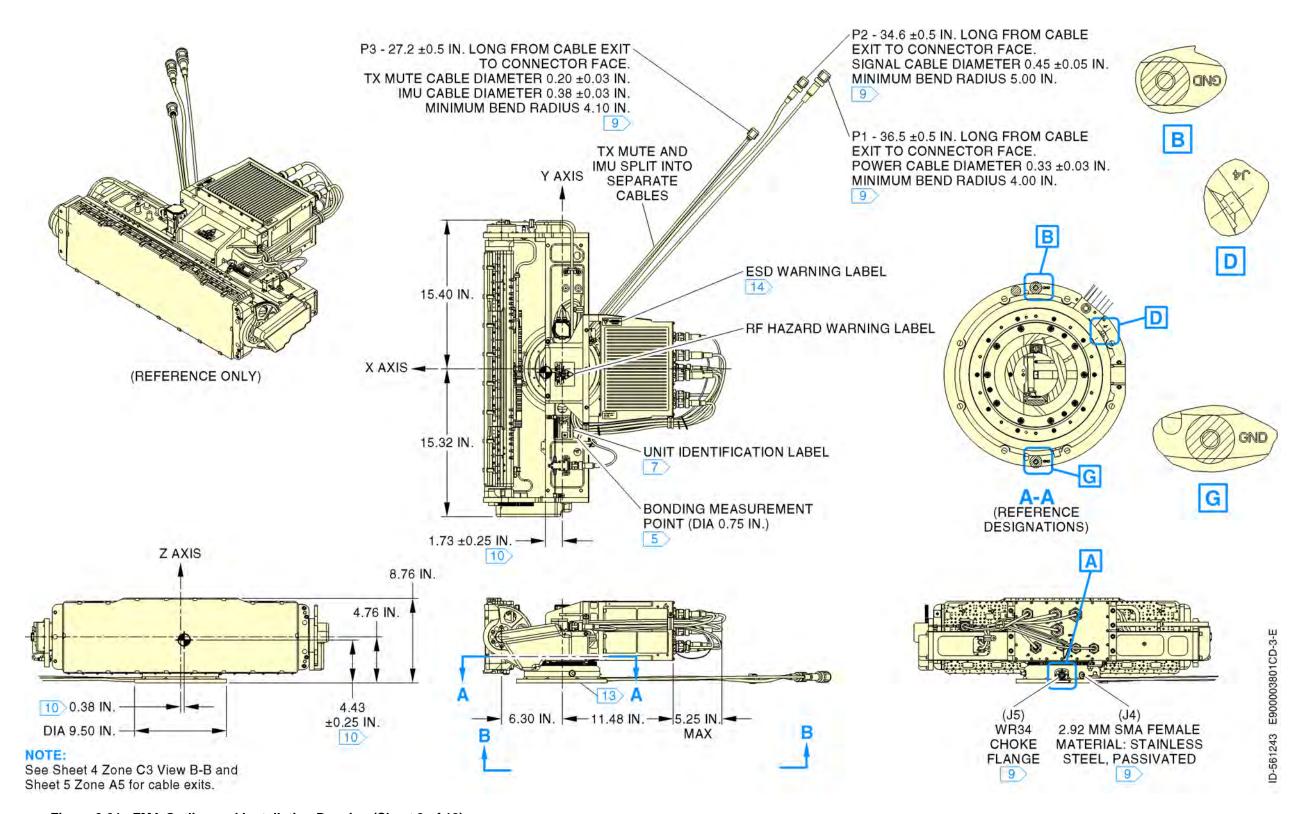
FMA Outline and Installation Drawing (Sheet 3 of 12)
